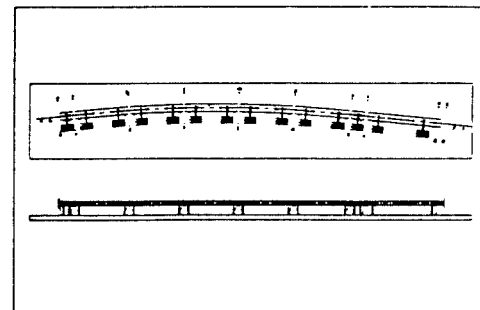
ARC MAGNET CHAMBER WELD FIXTURE
